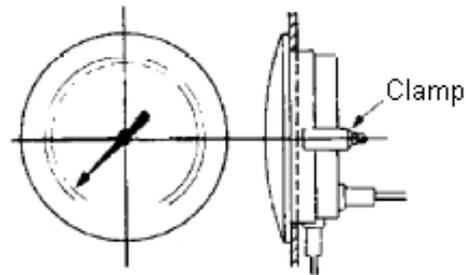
RIGID STEM MOUNTING (BACK, BOTTOM, SIDE OR TOP CAPILLARY ENTRY)
